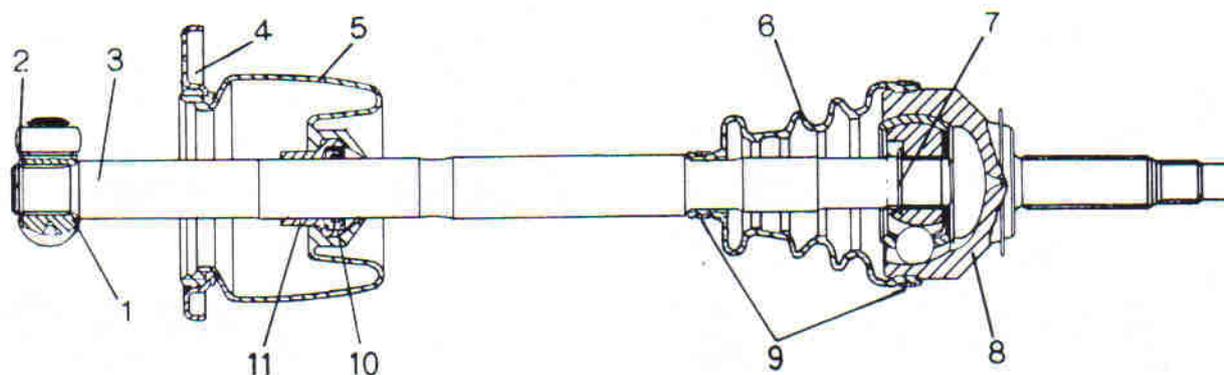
Sectional view of typical driveshaft (Sec 1)
